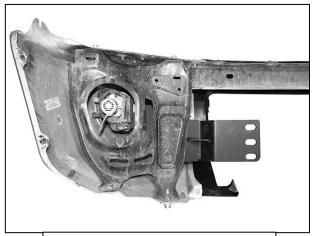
Reuse flange nuts to attach Inner Bumper Bracket to factory bumper bracket
